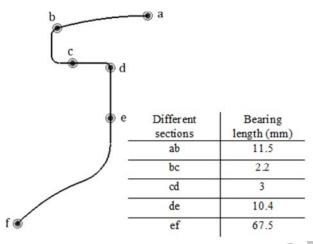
Bearing length in different sections of the first die شکل 3 طول بیرینگ در بخش های مختلف قالب اول
